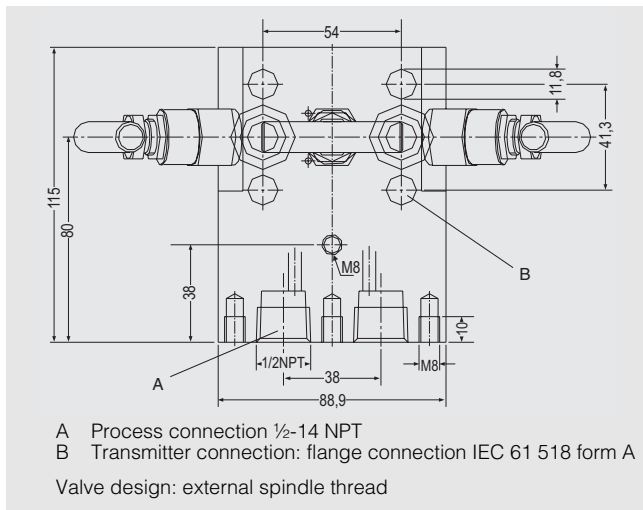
/91 Three-spindle valve manifold DN 5, dimensions
